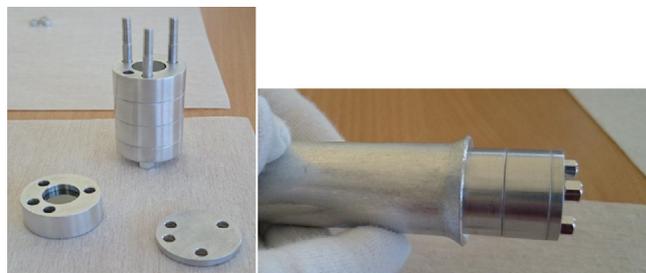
Sample holder fabrication and installation in the aluminium capsule.
